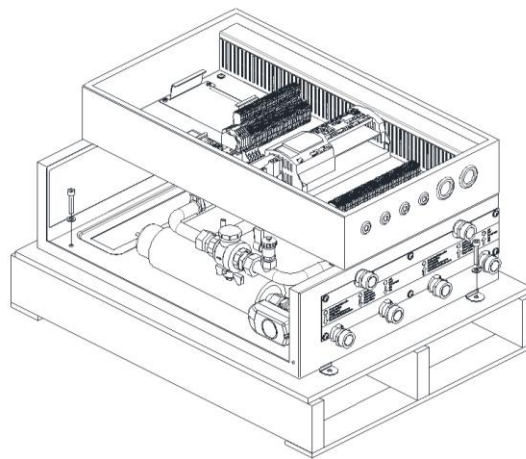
Disassembly of the screws that attach the Hidrokit indoor unit to the pallet.
